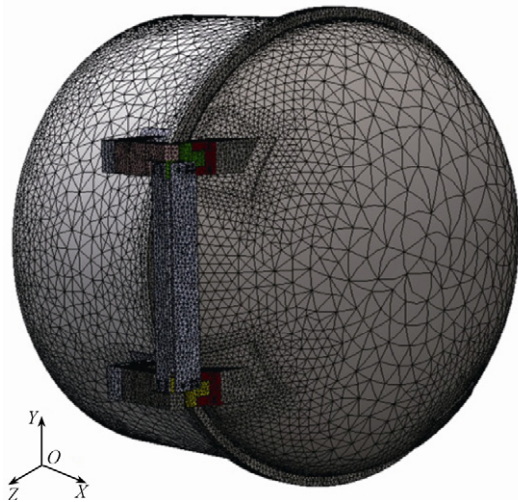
Grid figure of single-axis-double-pins hinged door mechanism.
